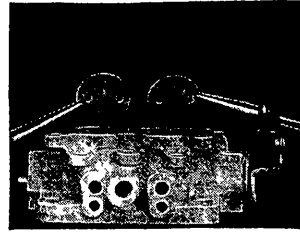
Install throttle valves. Small "c" in circle or part number should be toward idle port when viewing casting from manifold side. Center throttle valves by tapping lightly and hold in place with fingers before tightening screws
